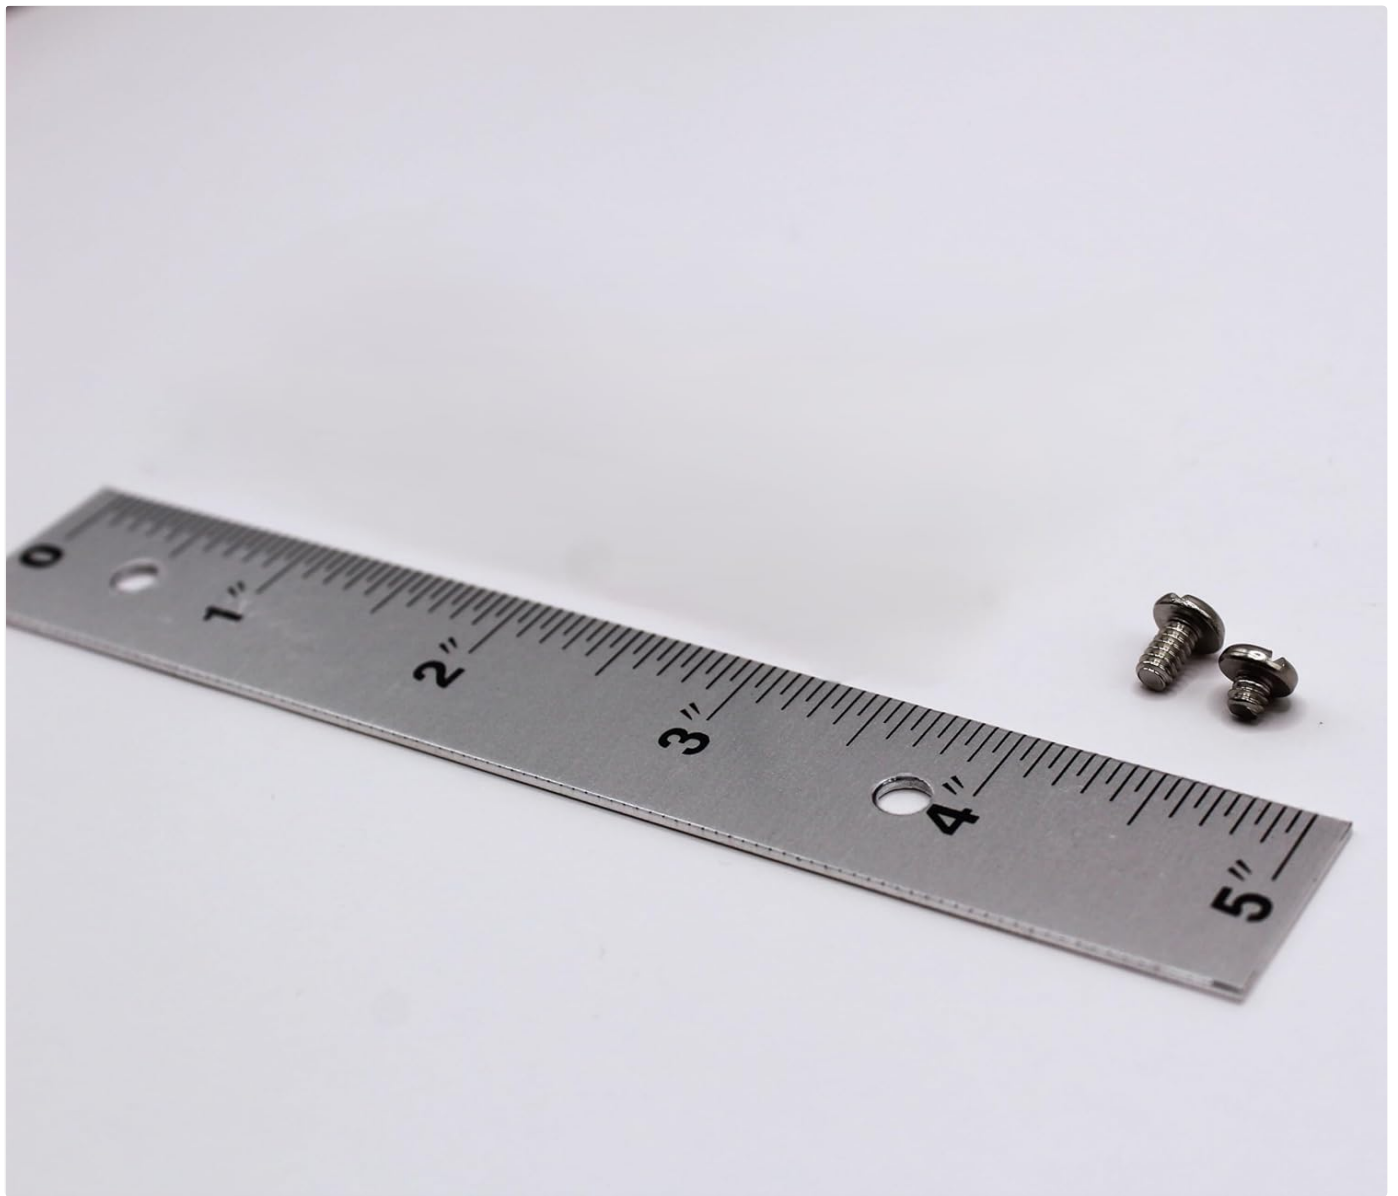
Bridgeport Micrometer Scale (OEM 1195306) shown with its two accompanying mounting screws. This scale is designed for precise measurement readings on a milling machine.
